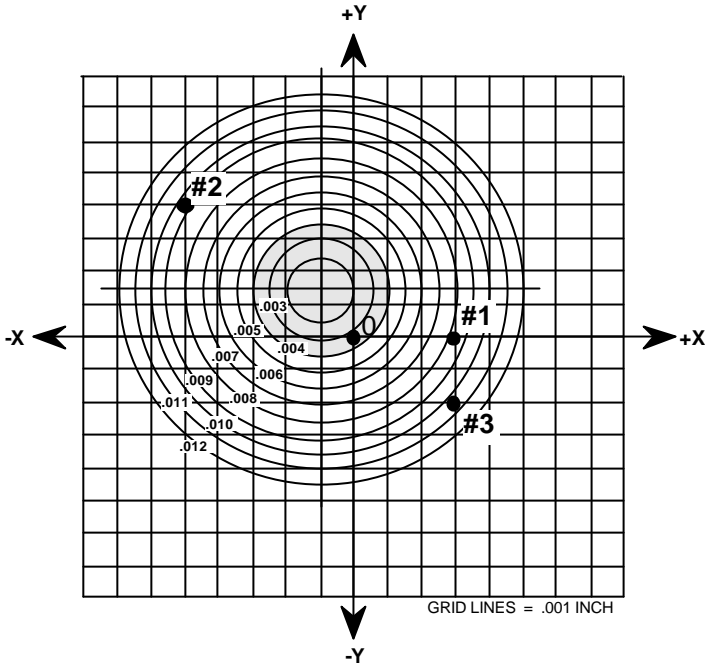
Verifying the hole pattern after datum shift
